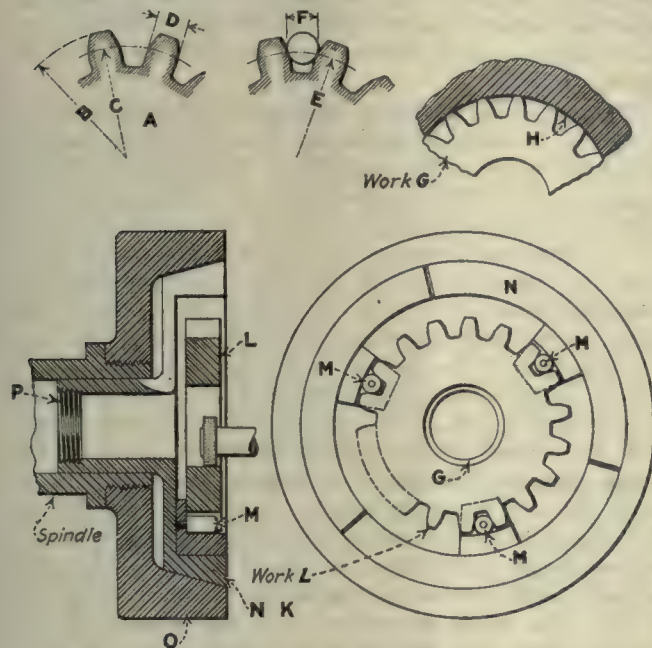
LOCATING SPUR GEARS FOR GRINDING
